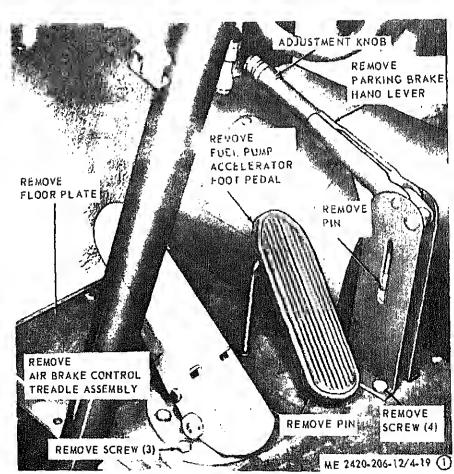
Parking brake hand lever and cable, removal and installation (sheet 1 of 2).
